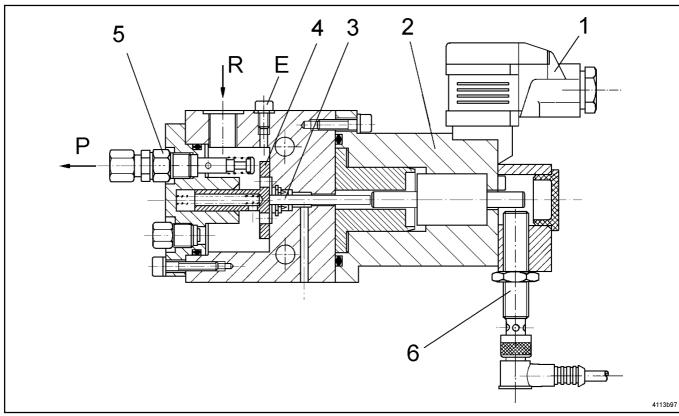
Sectional drawing of the PMA-1 magnetic pump
